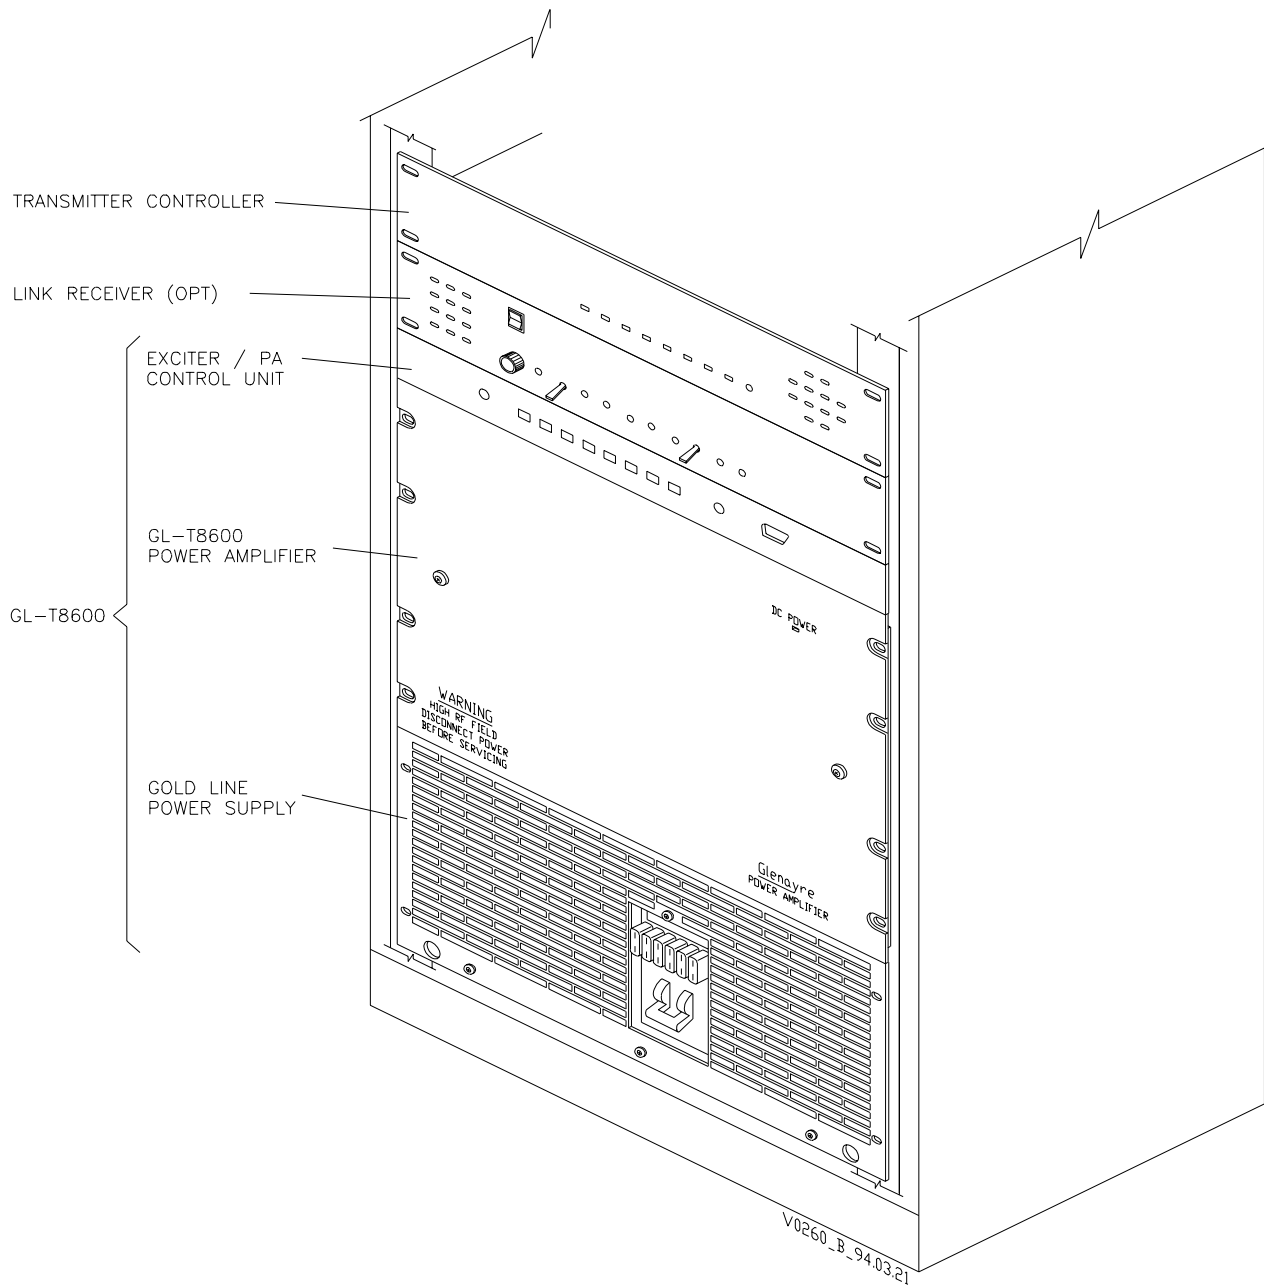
GL-T8600 Transmitter Isometric Front View
